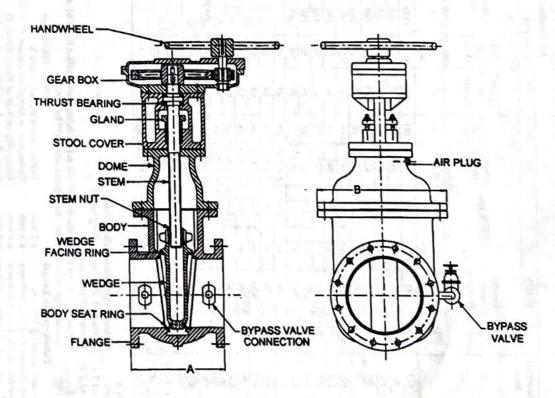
C Typical Sketch of a Sluice Valve with Ball Thrust Bearing and Spur Gear Arrangement
